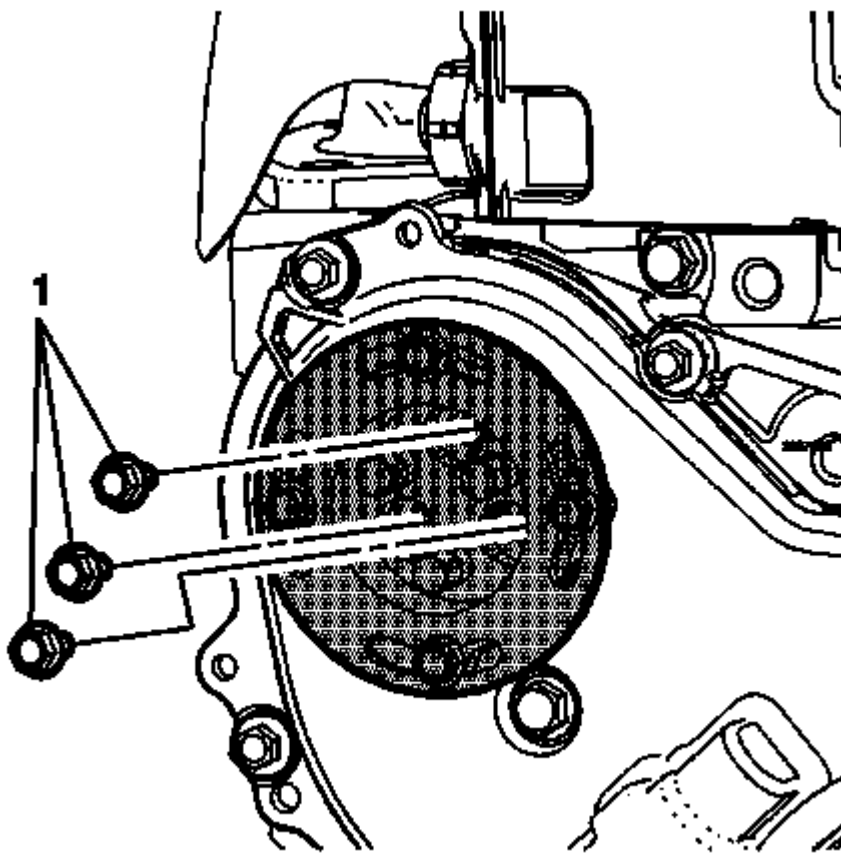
Water Pump Sprocket To Water Pump Fasteners
